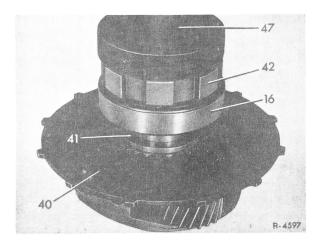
16 Ball bearing 40 Sun gear 41 Thrust washer
